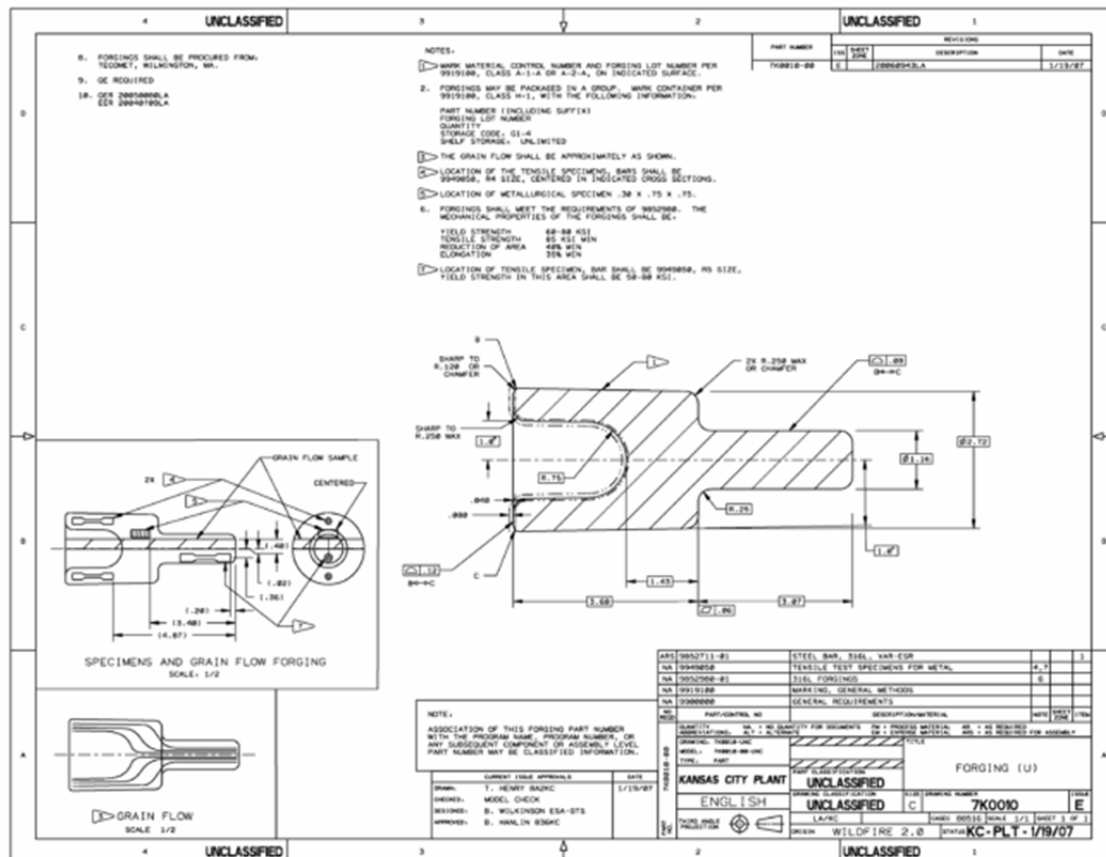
Type 316L Stainless Steel Cup 7K0010 Forging.
